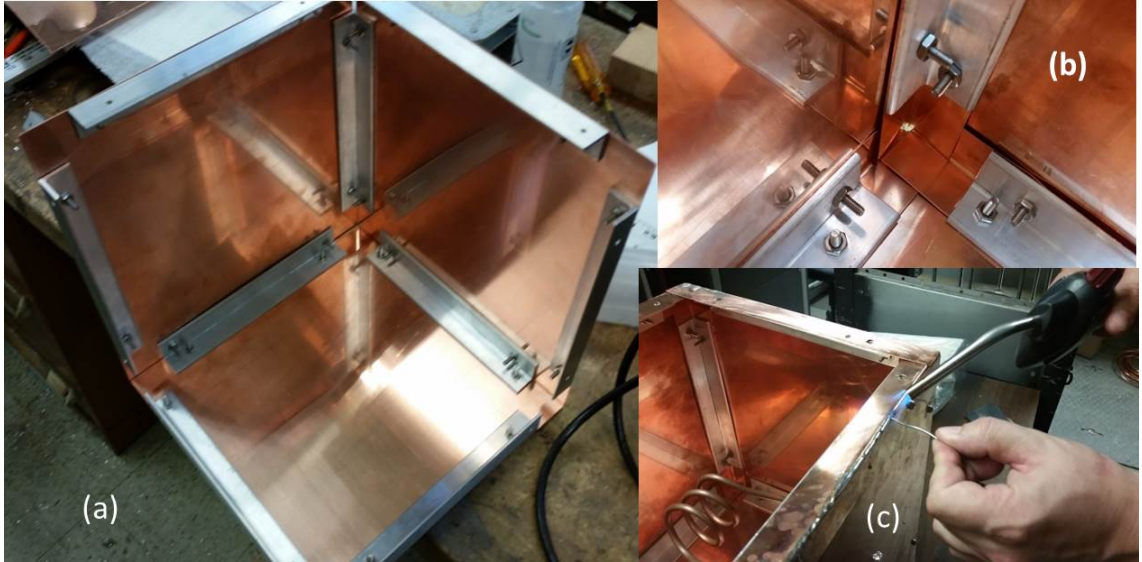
Pictures of the rf box construction. (a) $0.25''$ Aluminum angle is used to keep a rigid structure. (b) $0.01''$ copper sheet is bent and placed between the edges and aluminum angle. (c) The copper sheet is soldered to the box sides to maintain uniform conductivity.
